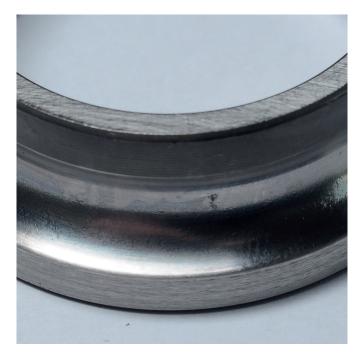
Traces of destruction and pitting hole of bearing (Toyota Avensis)
